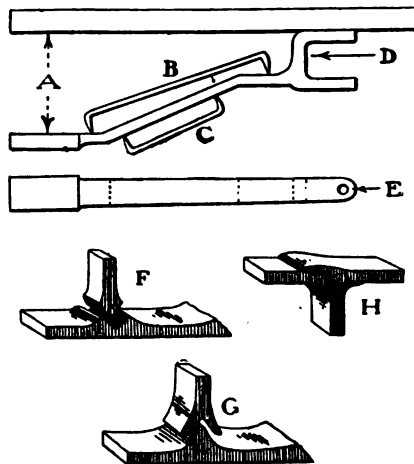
ADJUSTING ECCENTRIC ROD AND FORGING THE JAW OF A ECCENTRIC.
